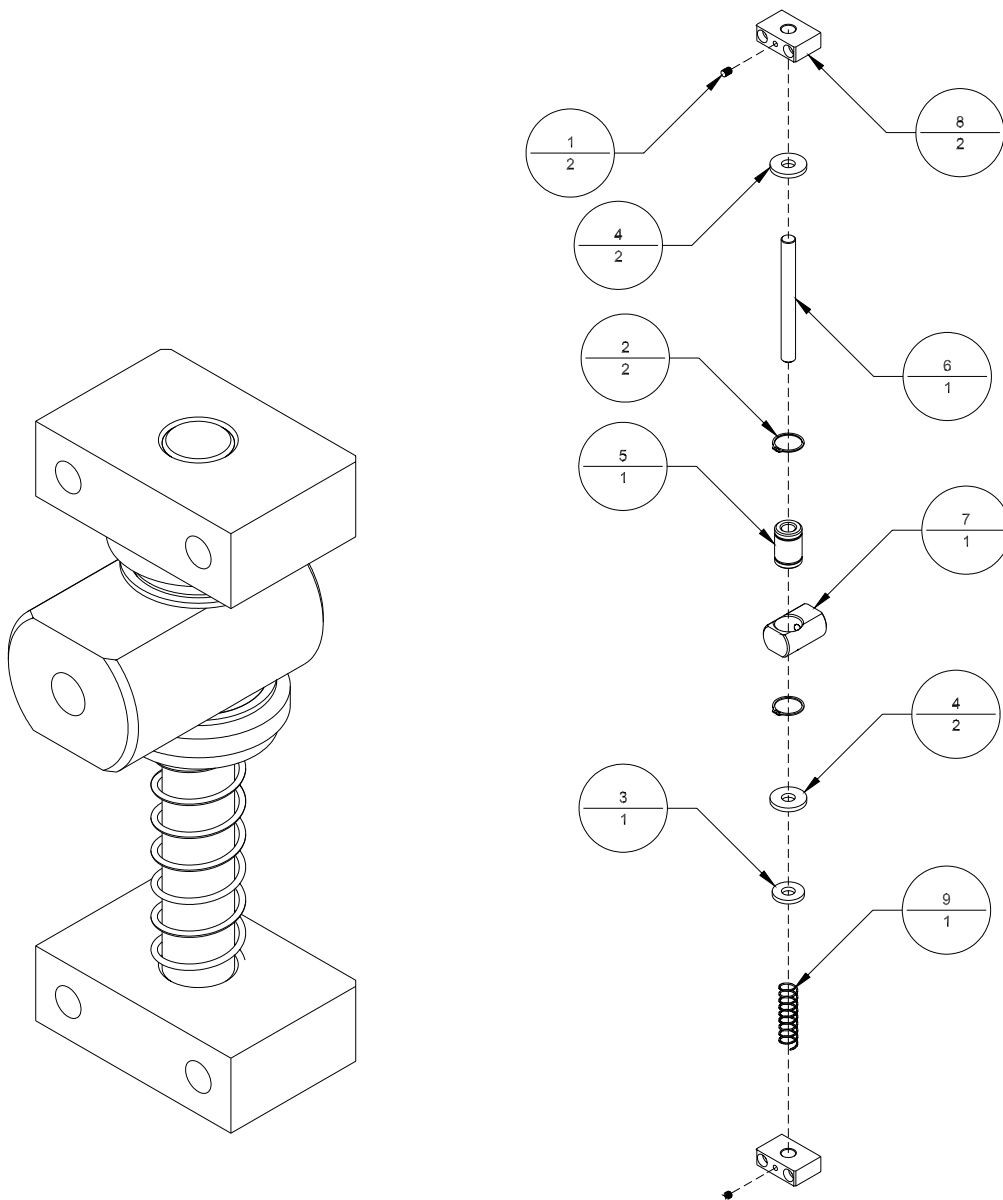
Oscillating Idler Assembly (9101233A)
